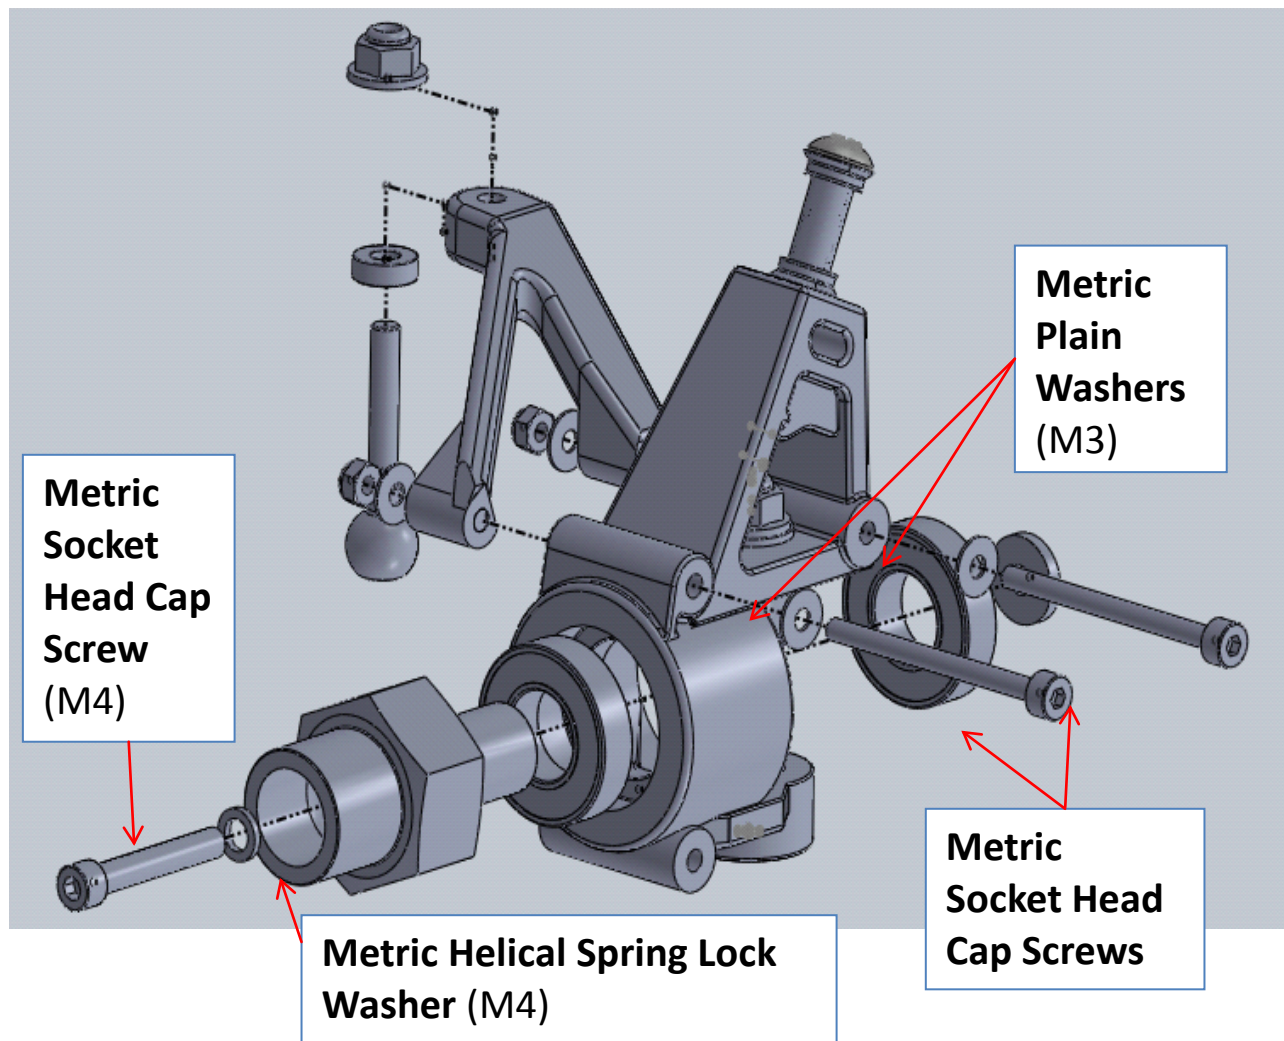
6. Front right hub assembly shown in detail with fasteners identified.
